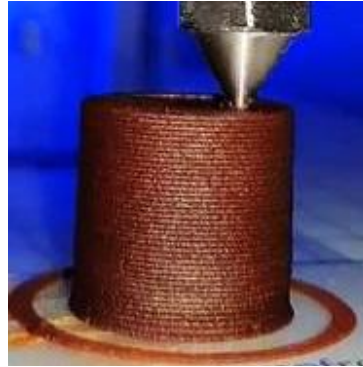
Printing of a cylinder with 0.7 mm nozzle.
